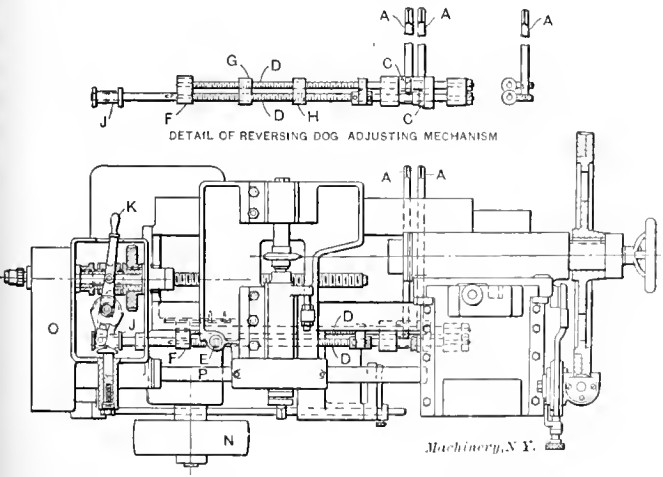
Plan of Gear-cutter, with Detail of Stop Adjusting Mechanism.
